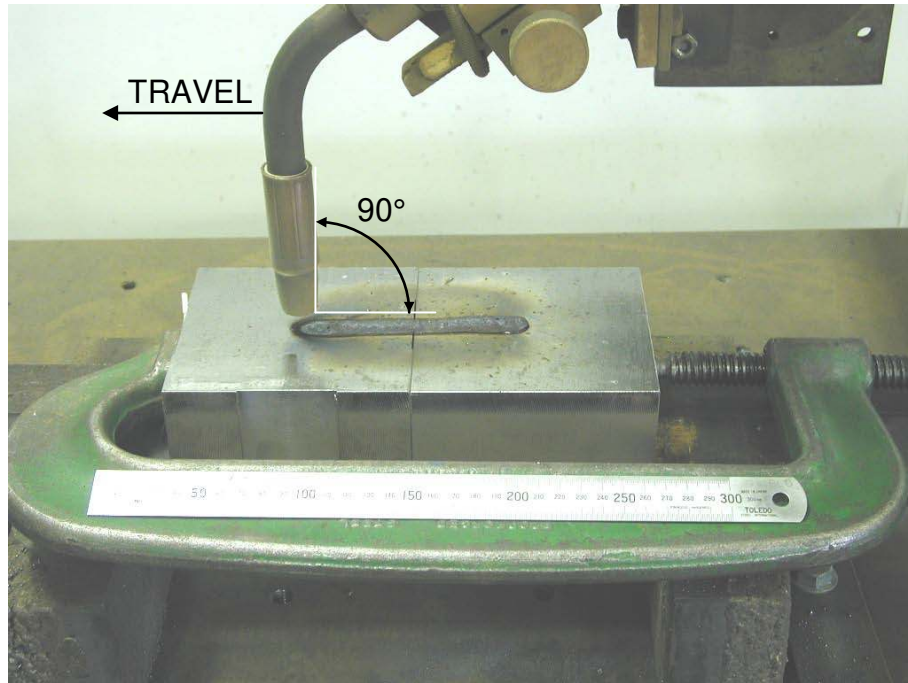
11 Photograph showing a weld bead deposited over the clamped G-BOP test block assembly.
